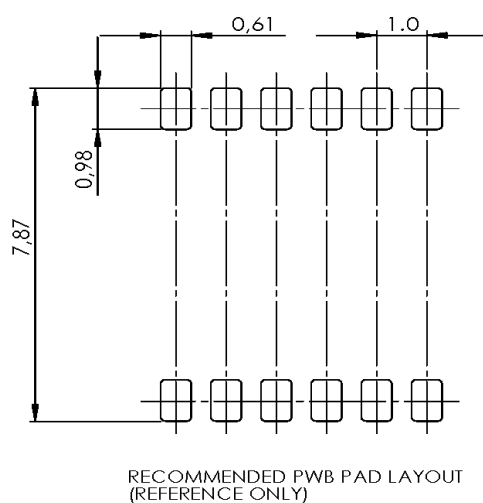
Recommended PWB pad layout for SCA3300-D01. The tolerances are according to ISO2768-f (see Table 11).
